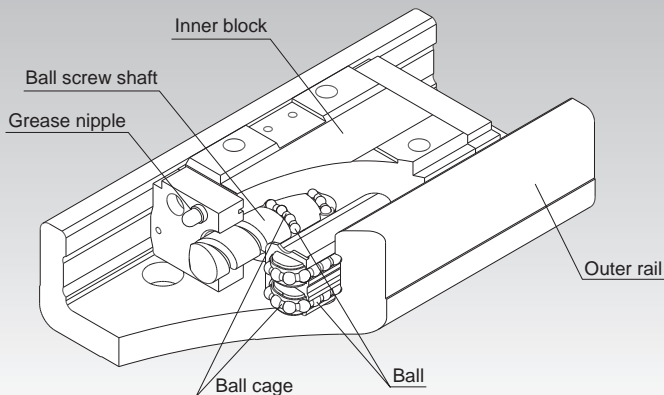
Structure of Caged Ball LM Guide Actuator Model SKR
